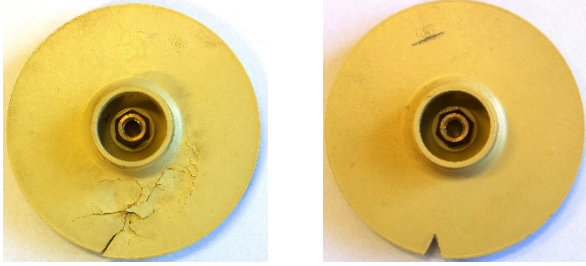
Damage induced on the impeller: (left) Impeller with crack; (right) unbalanced impeller.
